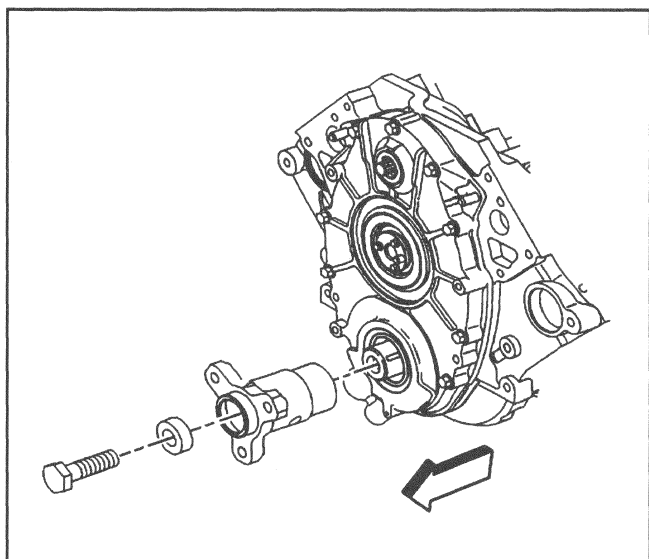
Crankshaft Balancer Hub, Bolt, and Washer
